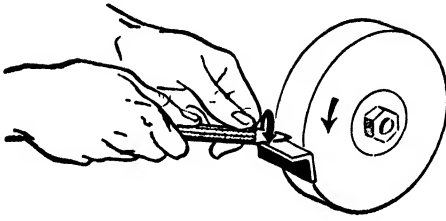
Grinding a center punch. Hold the punch against the wheel at the desired angle and roll it slowly. Also, move it from side to side in order to distribute wear on the wheel.
